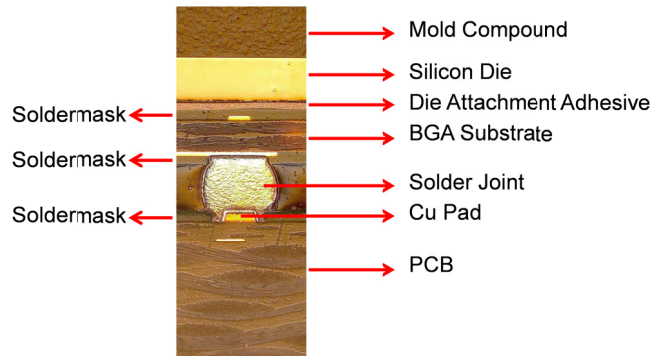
Optical Microscopy Cross-Section of 15 mm BGA
